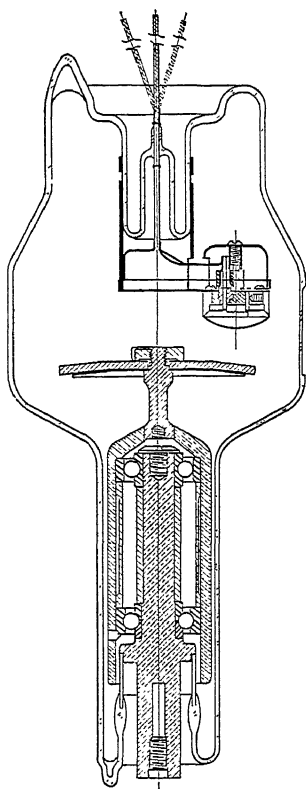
Section of Rotating Anode Tube Shown in Fig. 9. (Courtesy Machlett Laboratories.)
